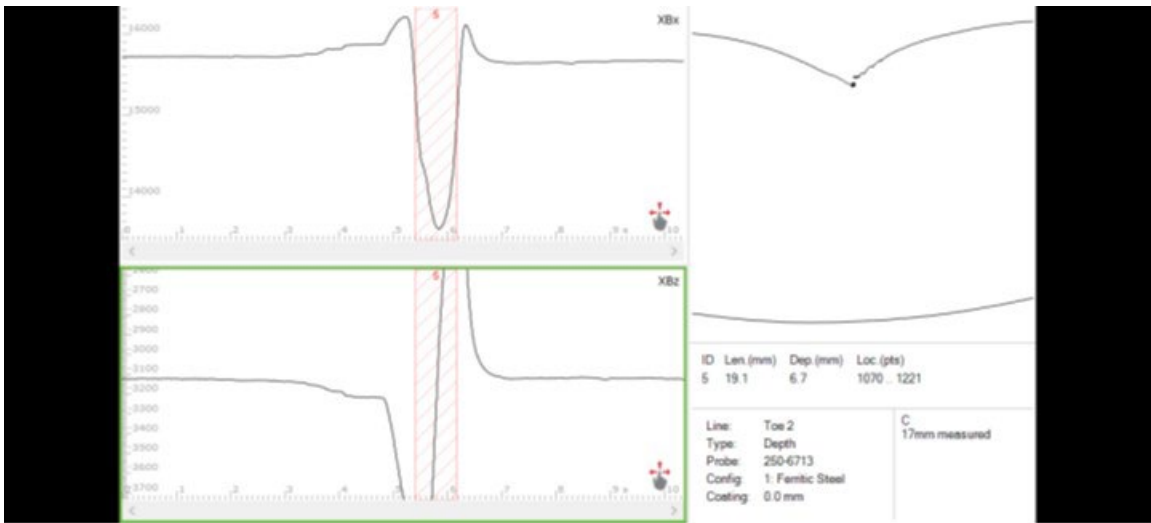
ACFM scan data of Flaw 5 for TTCI-2 butt weld MG panel
